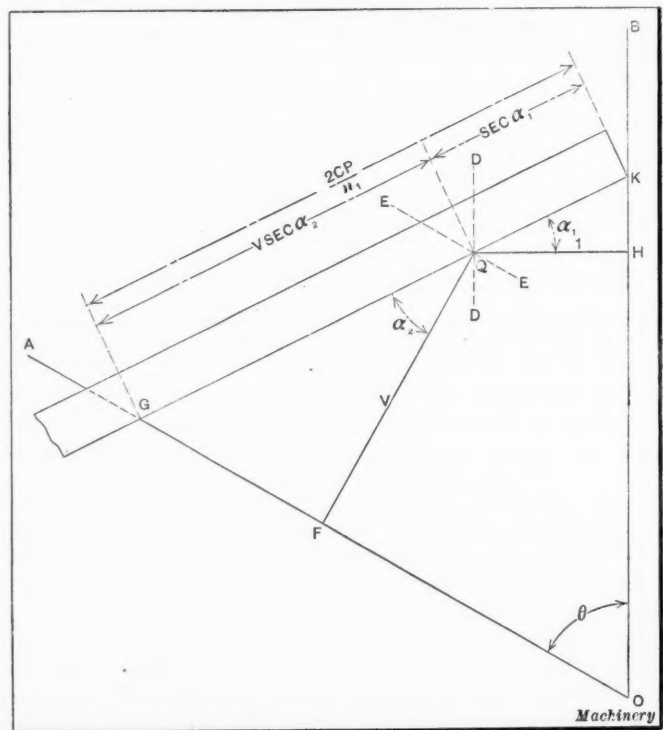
Graphical Method of determining Helix Angles of Pair of Spiral Gears to fulfill Specified Conditions
